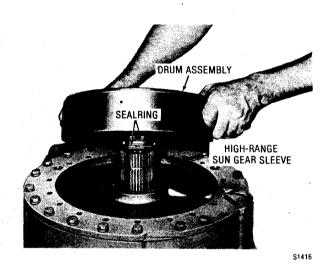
Removing low-range clutch drum assembly (TRT 2221-1, 2421-1)
